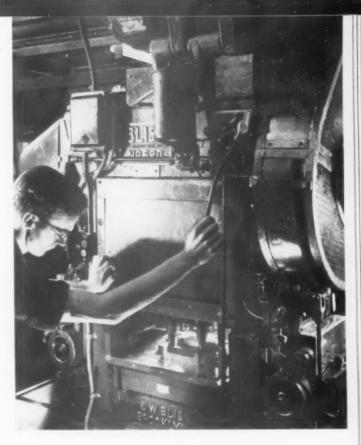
The tool engineer, working with the machine tool builder, has been designing machines which will do more operations faster with greatly reduced need for skilled labor.
